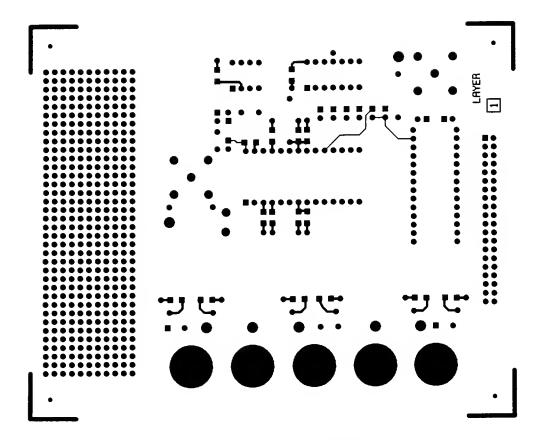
Component Side PCB Layout (Not Shown to Scale)
